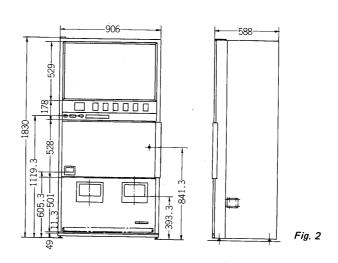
is a photograph showing this vender, and Fig. 2 shows external dimensions.
